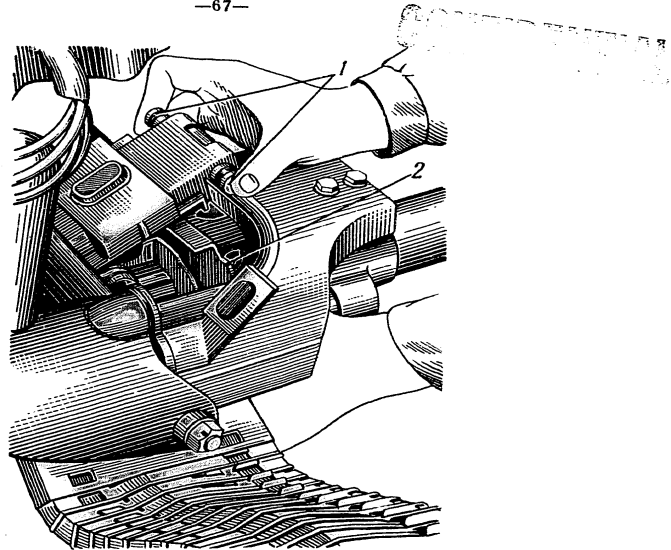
Press Fasteners 1 of Machine Gun Cover, Turn it, Depress Out Latch 2 and Remove Feed Opening Assembly together with Flexible Chute
